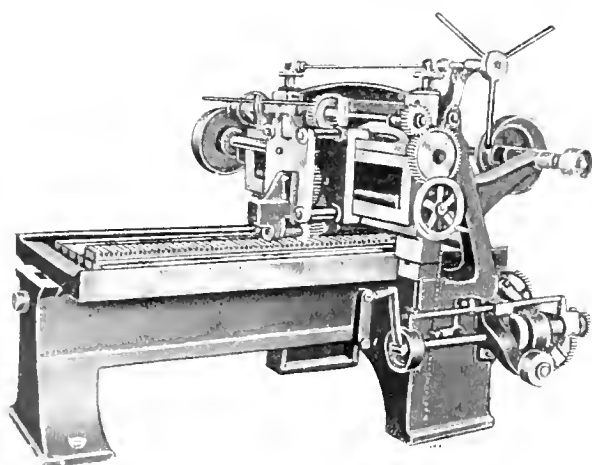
Planer Type Automatic Rack-cutter, built by G. Wilkinson & Son.
